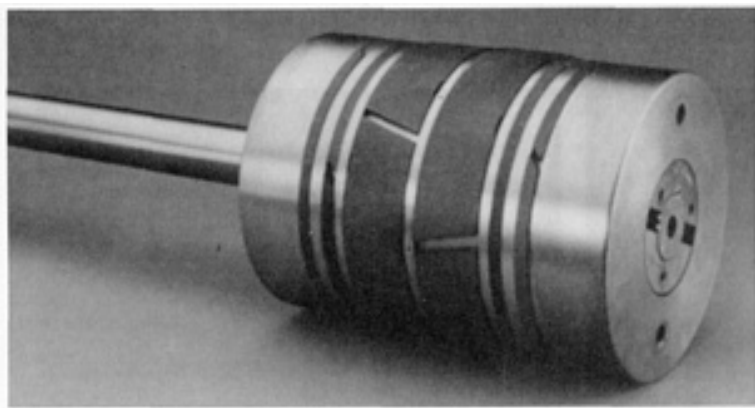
Crosshead-type reciprocating compressor piston and rod. Courtesy of Dresser-Rand
